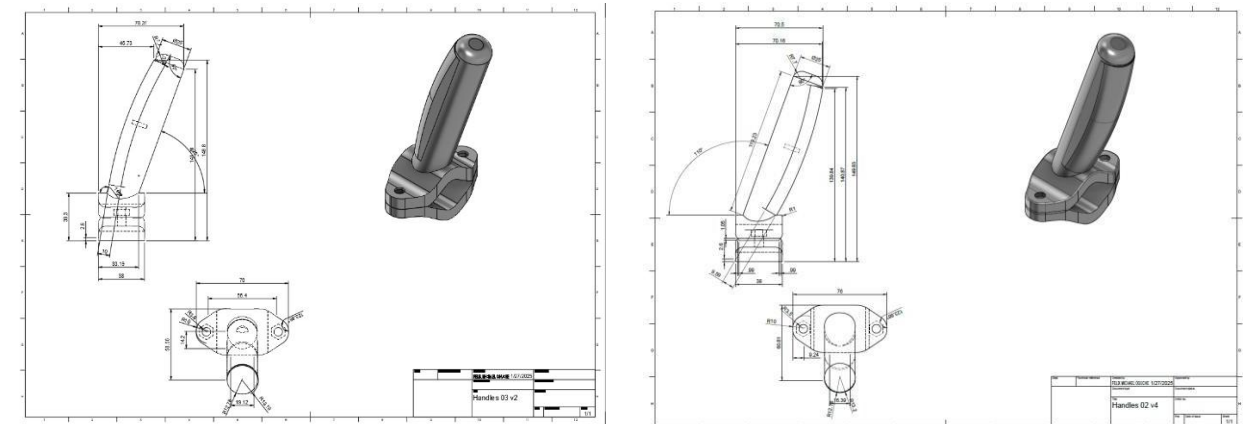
Prototypes 3 and 4: Adjustable Auxiliary Handle attached to a straight-handled tool. This design provides an additional grip point, and an adjustable clamp mechanism accommodates tool handles of varying diameters.
